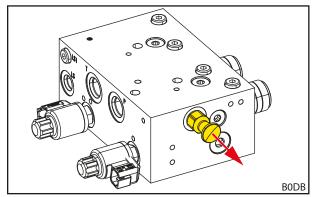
Pulling out the pressure relief valve on the REAL³ valve
